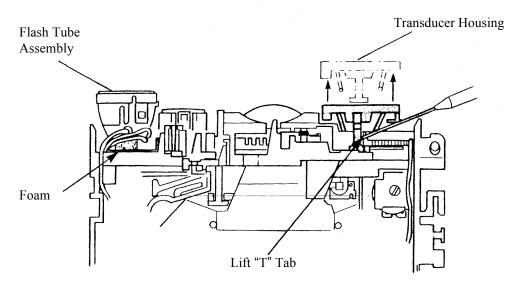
Removing Transducer Housing & Reflector Assemblies
